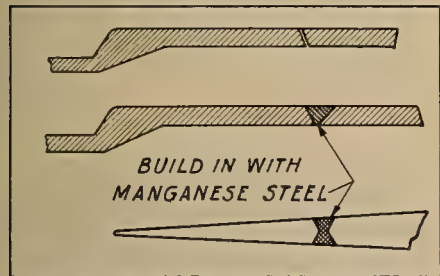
Sketch showing emergency welding on a cracked manganese frog point.
